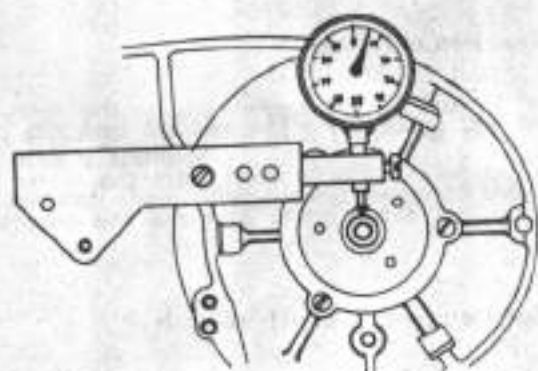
Control measurement of eccentricity R. H. pin of crankshaft
